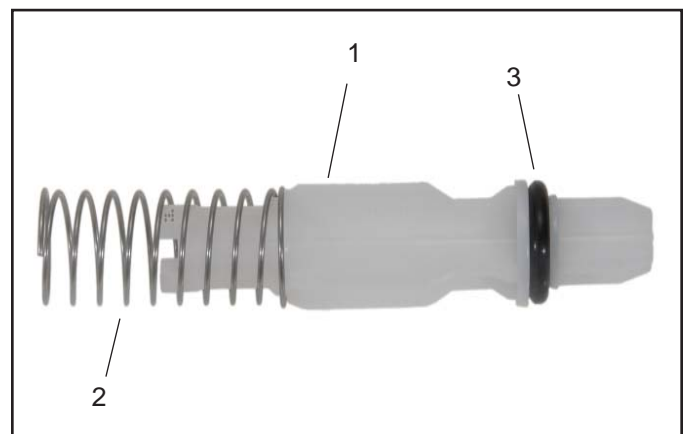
DELIVERY CHECK VALVE ASSEMBLY
